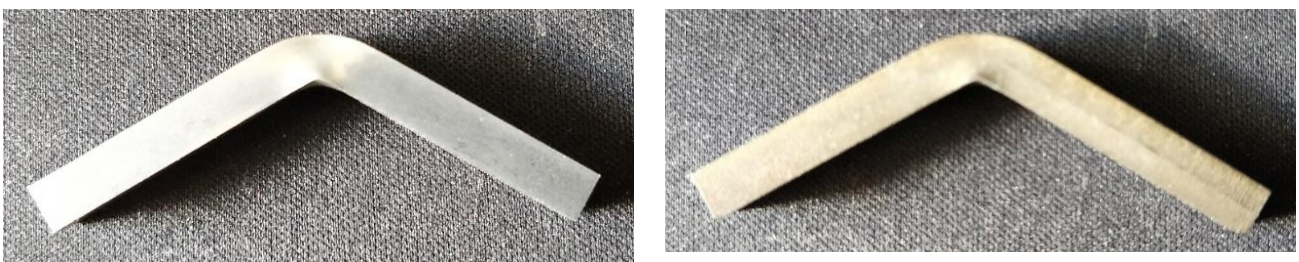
images of a 4.25mm thickness bend test specimen post-test at 10mm displacement, left; the horizontal face of the bend test specimen, polished and etched, right, the horizontal underside of the bend test specimen, rough from EDM machining.
